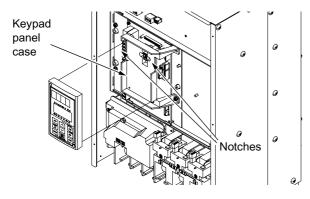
Removing the keypad panel (for inverter of 30 kW or more)
